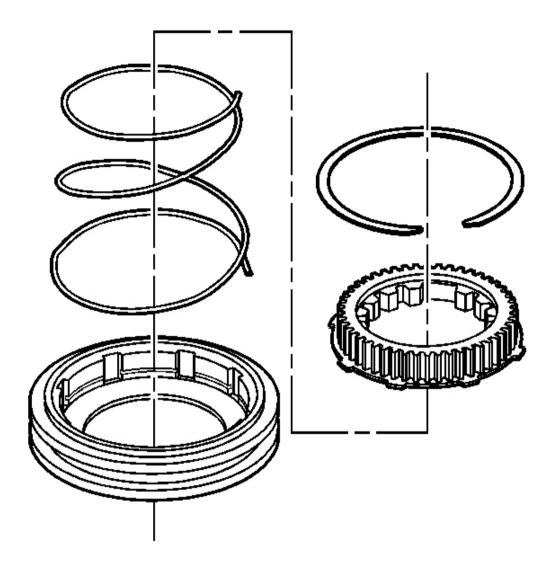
Lockup Shift Assembly Courtesy of GENERAL MOTORS CORP.
